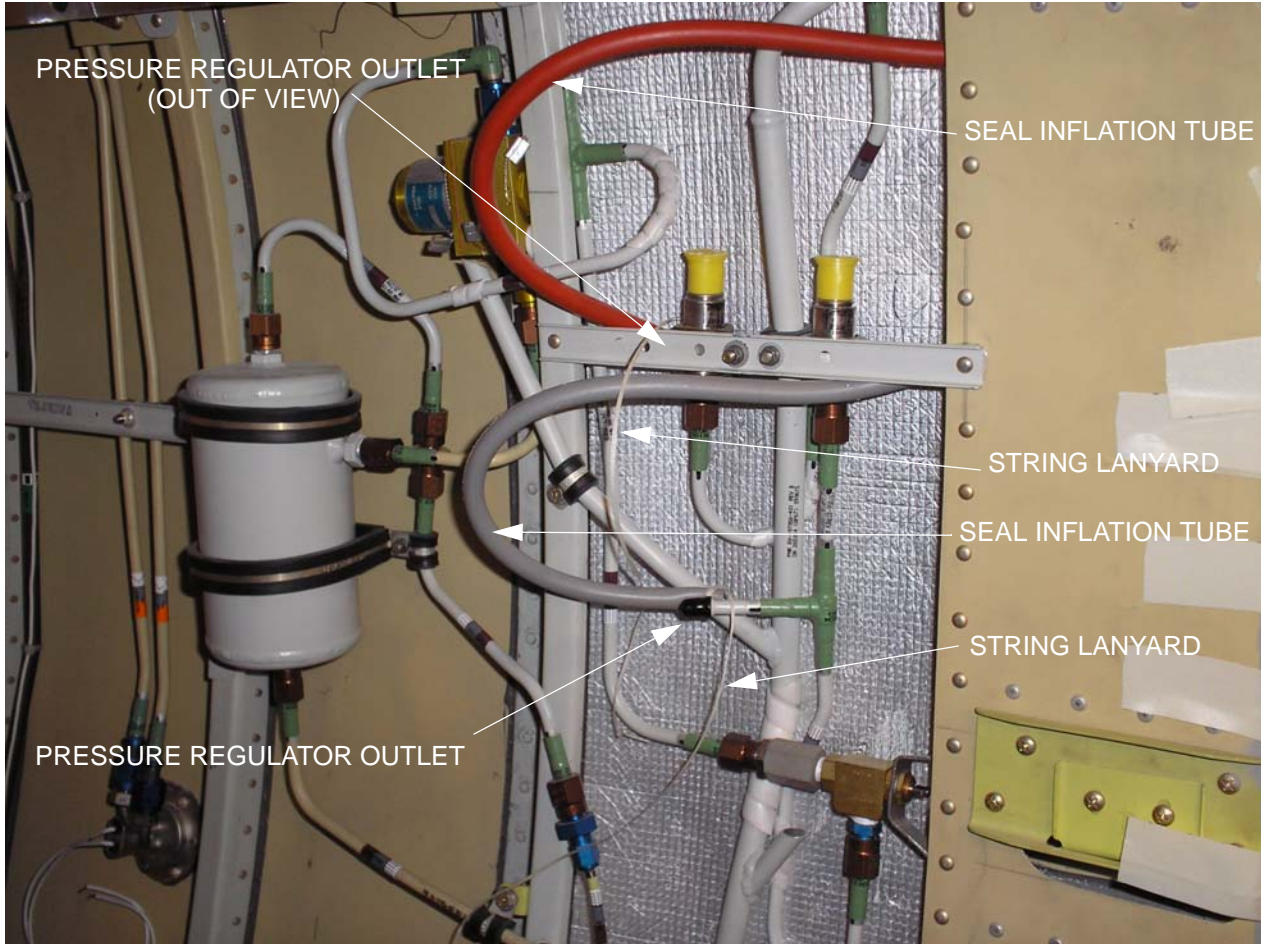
Upper Cabin Door Seal - Removal (Sheet 1 of 4)
